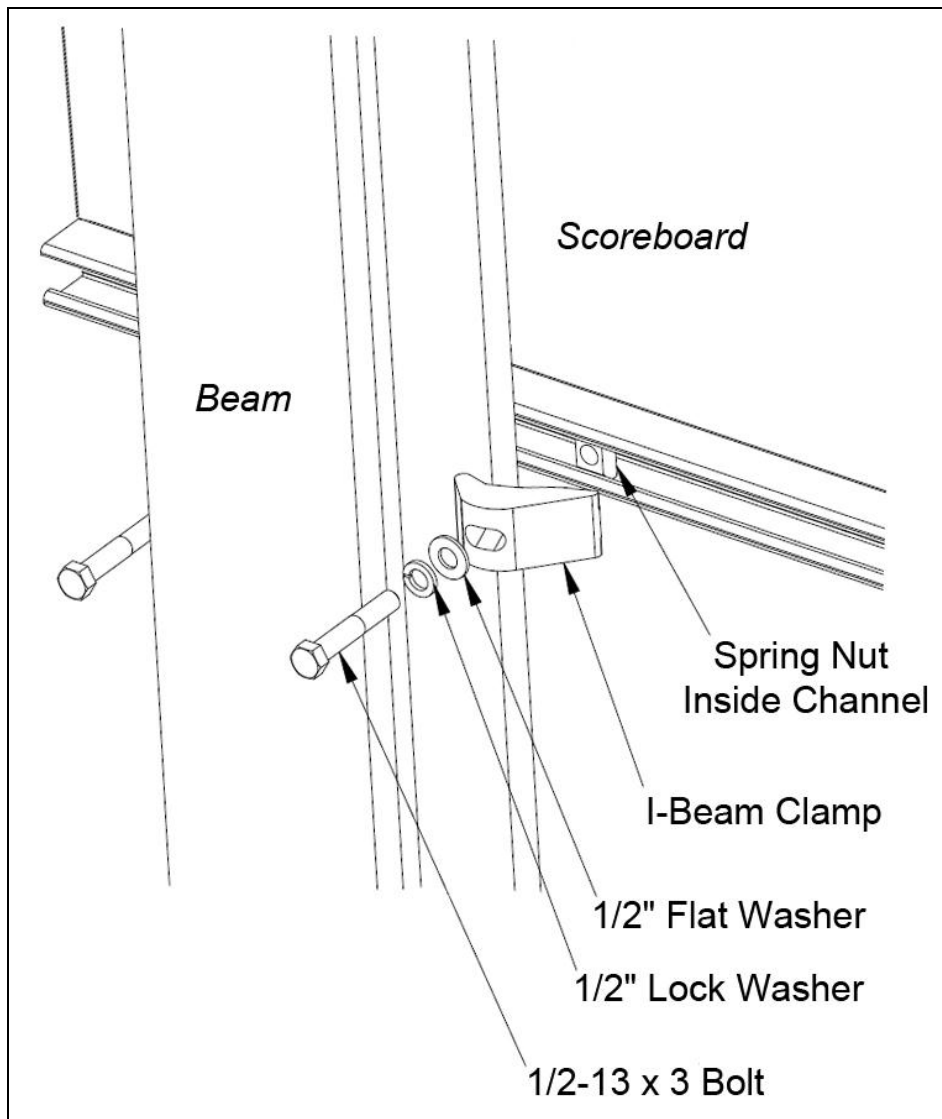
I-beam Clamp Mounting Method, Rear Isometric View
